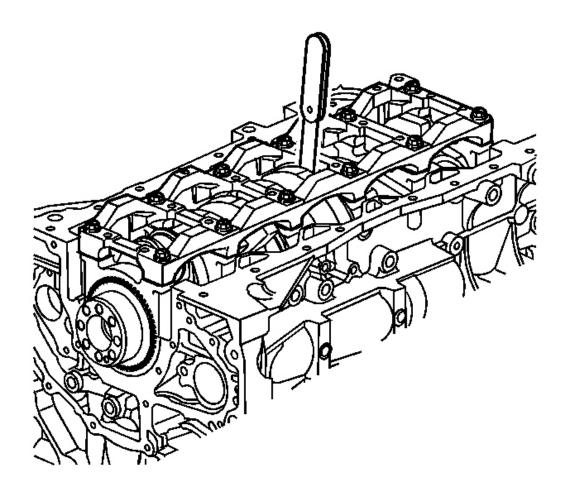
Measuring Crankshaft End Play Courtesy of GENERAL MOTORS CORP.
